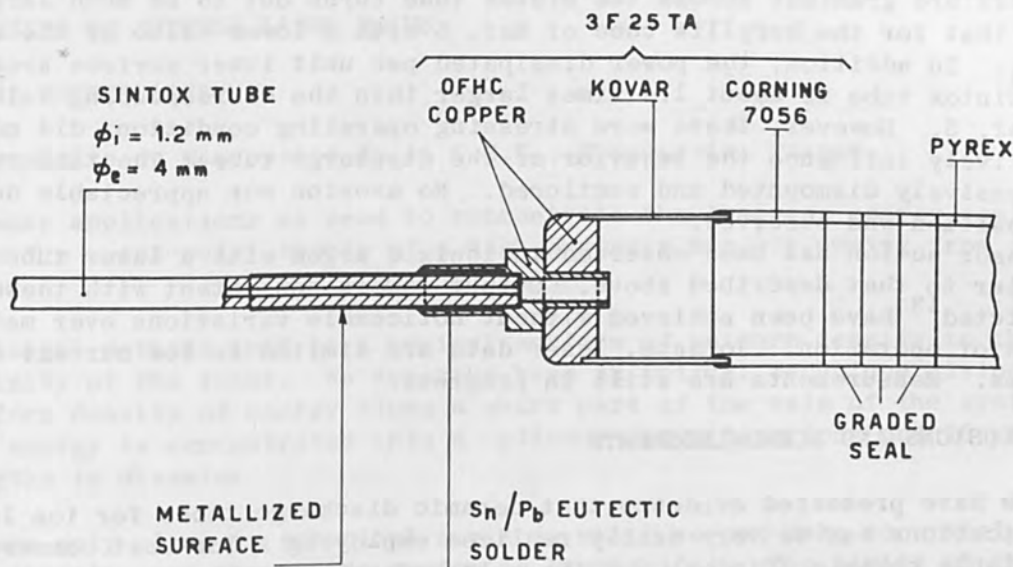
Schematic drawing of soldered metal-Sintox seal.
